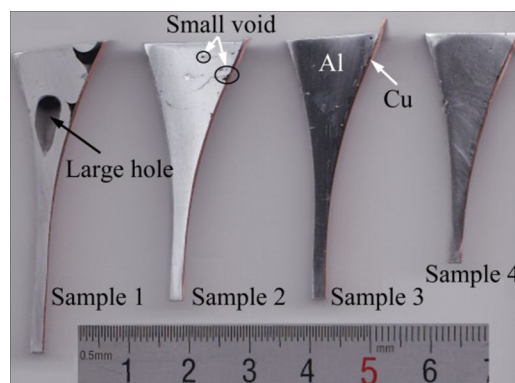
Sliced samples of workpiece in cast-rolling bonding area
